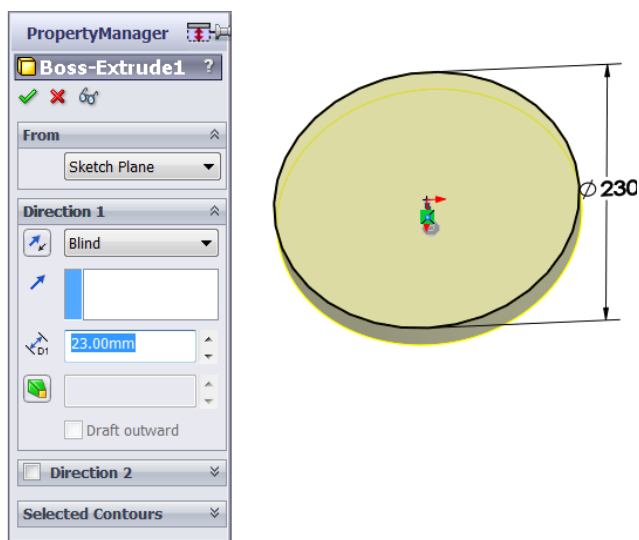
3D modelling of the mounting flange with adding material through the *Extruded Boss/Base* feature
